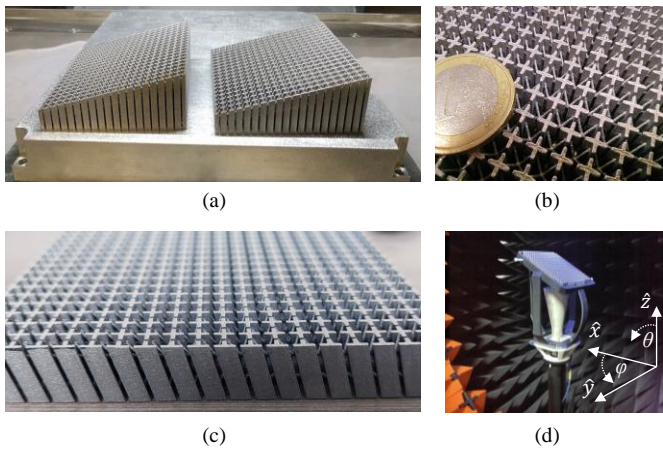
Prototype of the dichroic mirror 3D-printed in aluminum SLM and measurement setup: (a) the two raw prototypes just after the 3D-printing, (b) zoom view of the top cells, (c) one prototype after the wire-cutting of the bottom part and (d) measurement setup in the StarLab.
